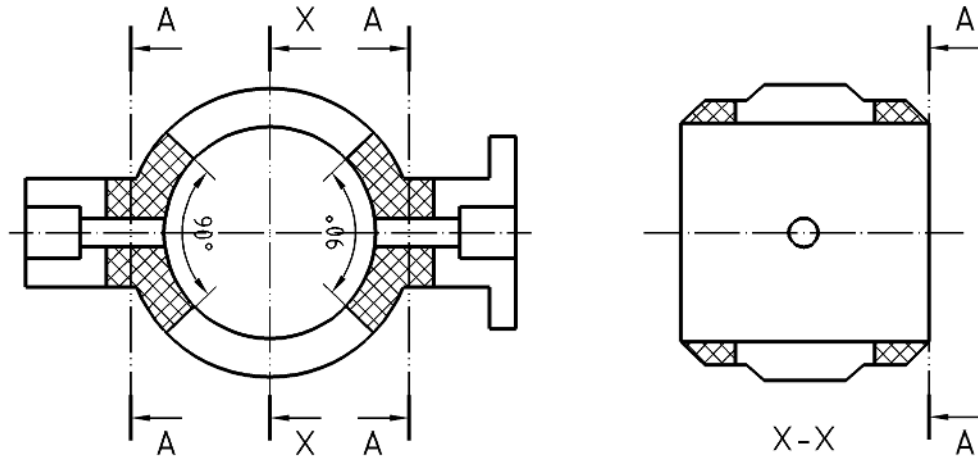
Typical casting section showing required radiographic examination of butterfly valve body
